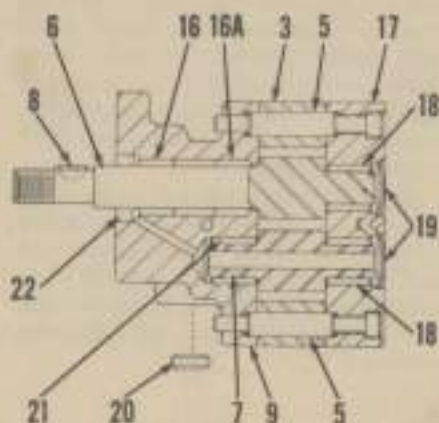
Cross-sectional view of Webster power steering pump showing bearing and seal location. Refer to Fig. 16 and Fig. 17 for exploded views.
